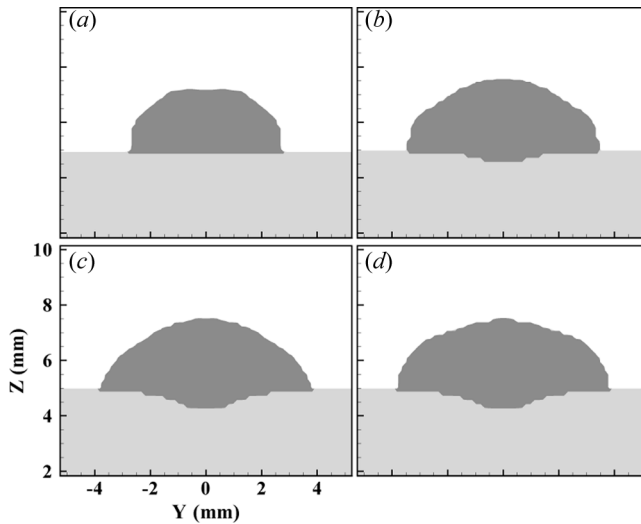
Cross-sectional view at $x=32\text{mm}$ showing the weld beads. (a) Cold start, (b) Hot #1, (c) Hot #2, and (d) Hot #3.
